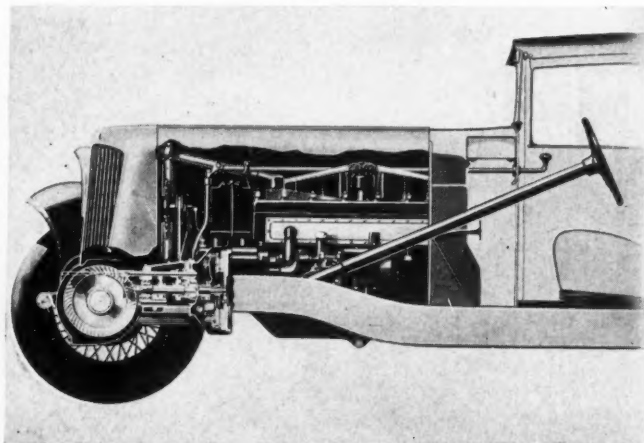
General arrangement of Cord front end, showing hypoid gear drive to wheels
